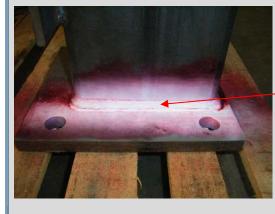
(b) – Fillet weld throat thickness
